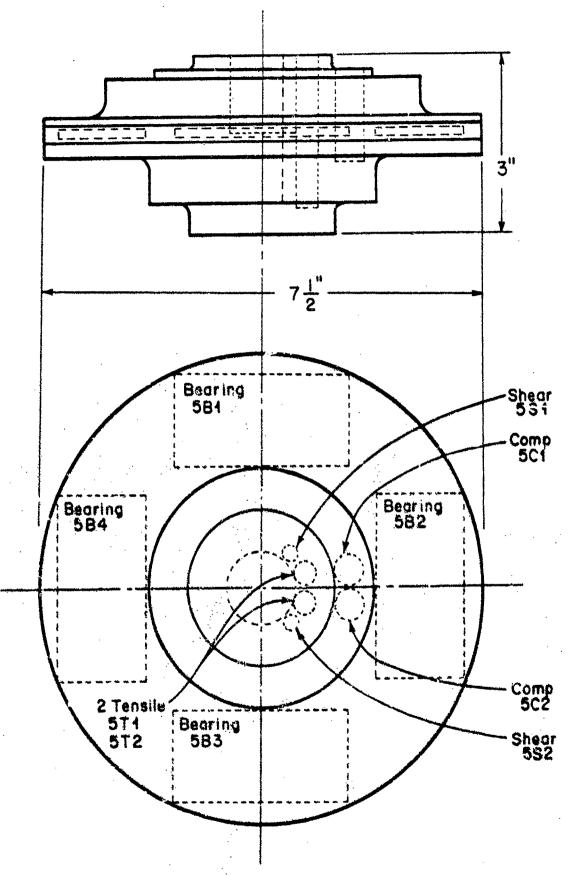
Location of test specimens for 15-5PH (H935) impeller #2 casting.
